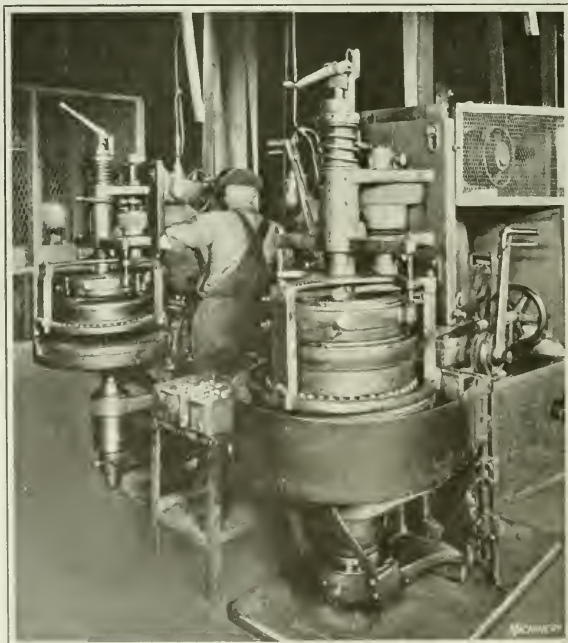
Vertical Type of Machine used for rough-grinding Steel Balls for Bearings
